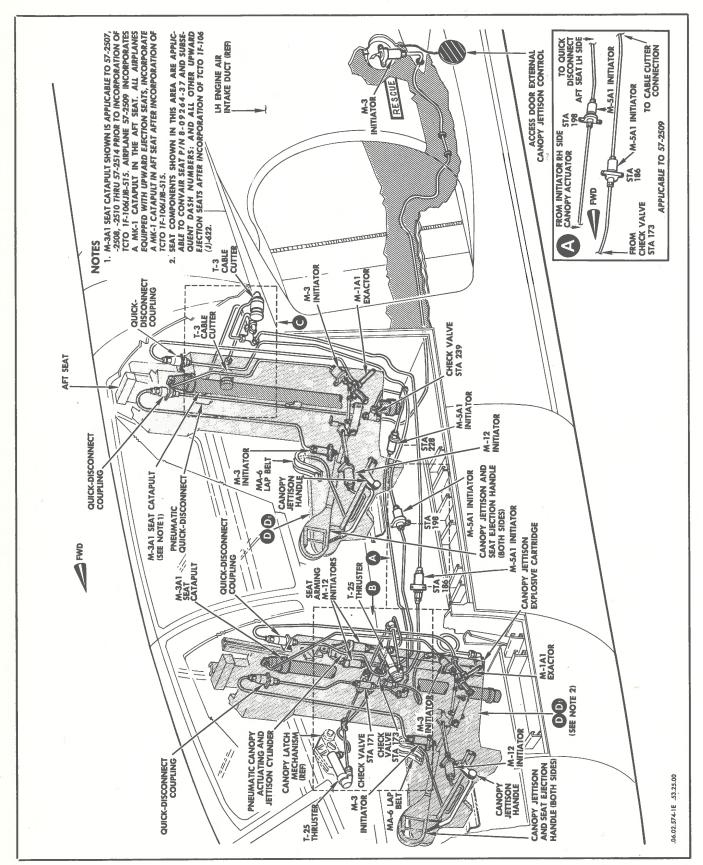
Pilot Escape System Perspective, Upward Ejection, F-106B (Sheet 1 of 2)
